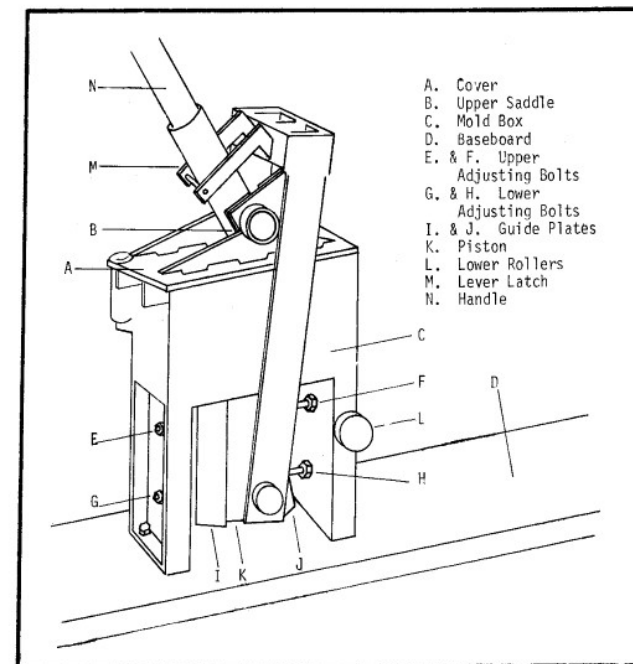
The CINVA-Ram Block Press and Its Parts
